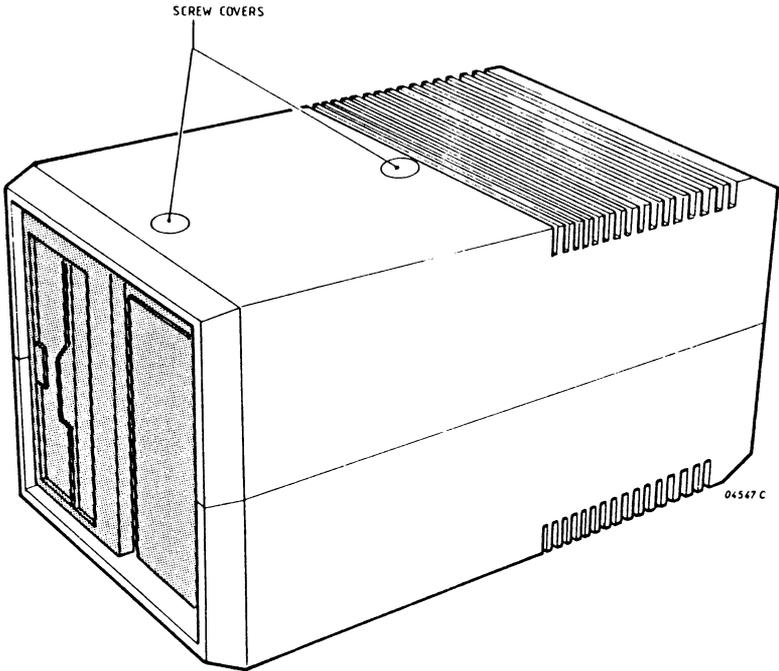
REMOVAL COVER EXTENSION CABINET P2621
